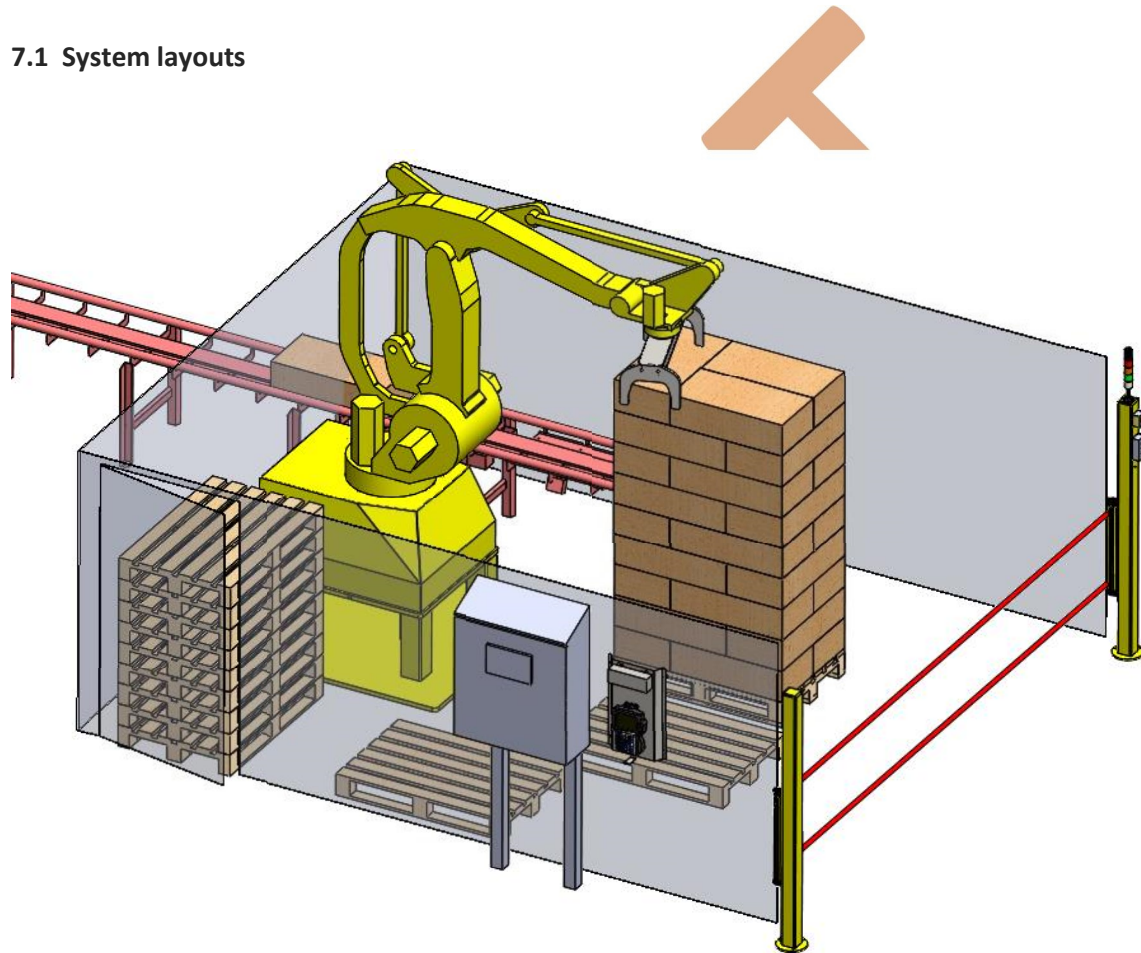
Layout of Palletizing on floor with 1 robot cell, and 3 loading stations.
